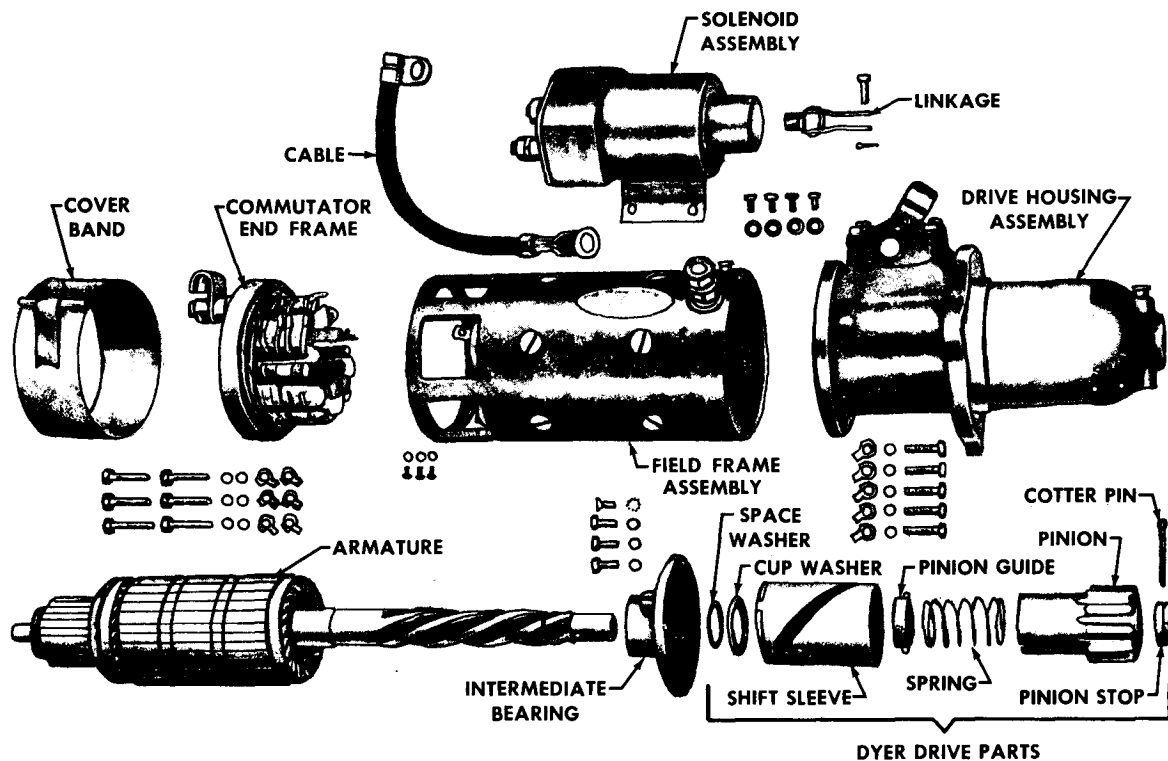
Disassembled view of heavy duty Dyer drive cranking motor.
